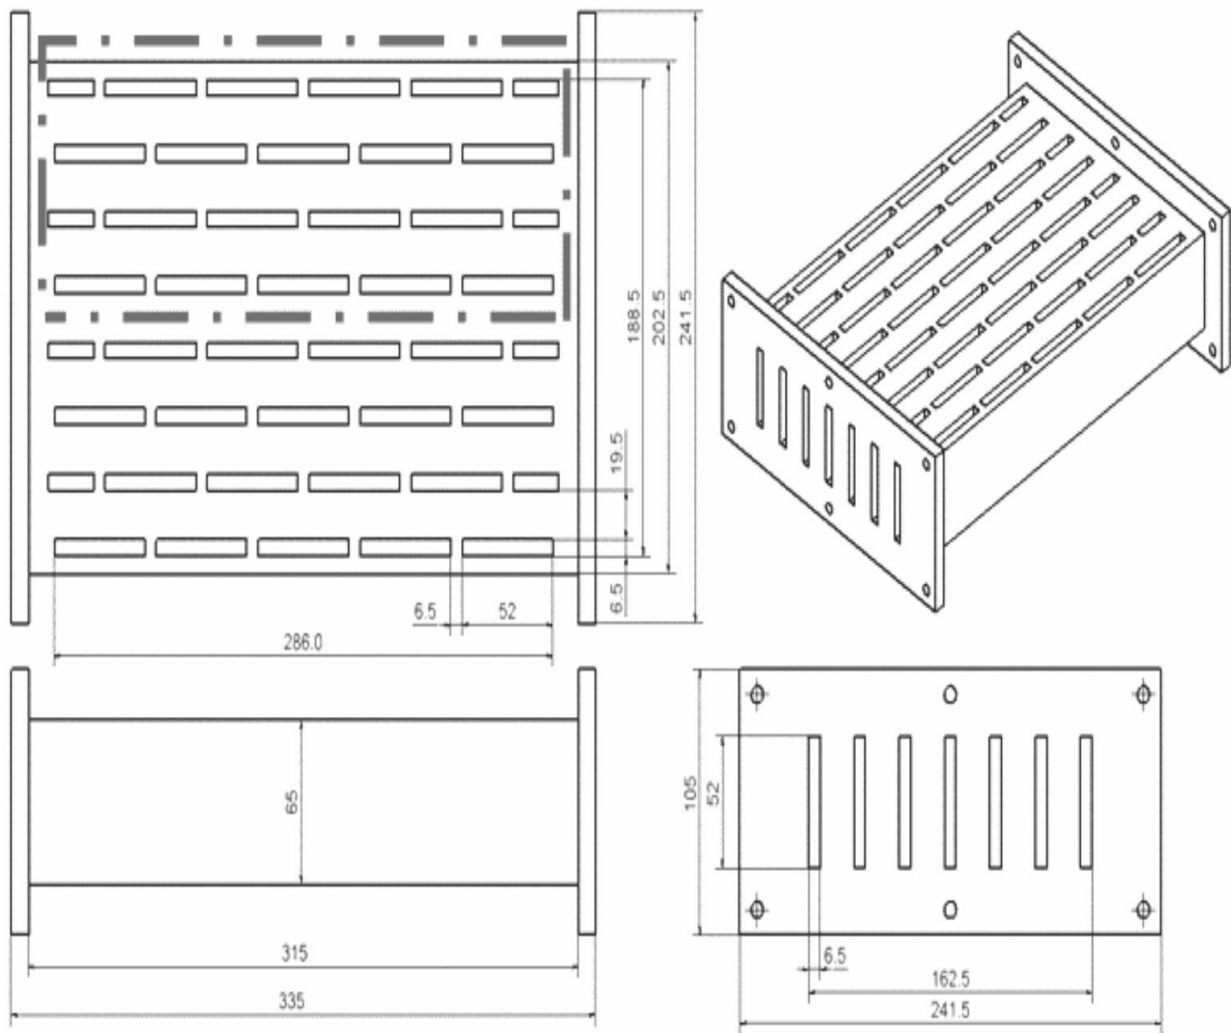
Schematic drawing of the ceramic heat exchanger (All dimensions are in mm)
